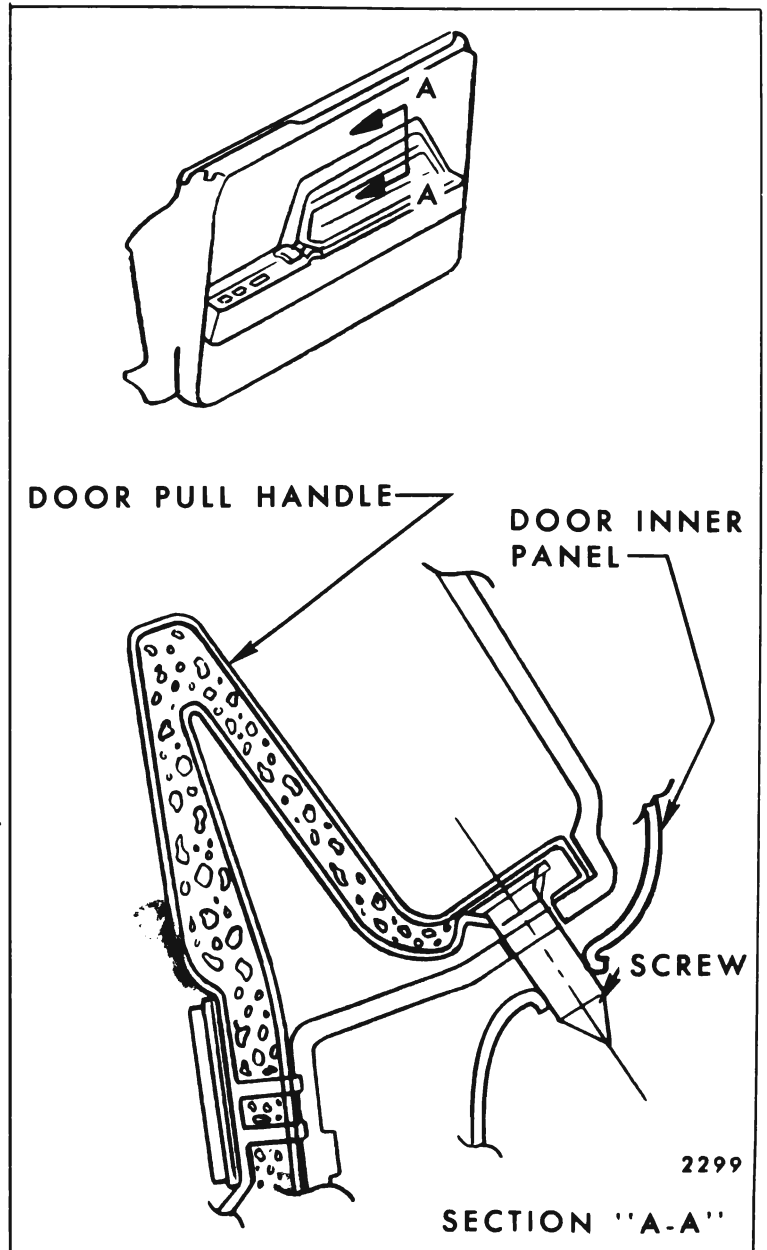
Door Pull Handle Retention - 49487 Style with Custom Trim
